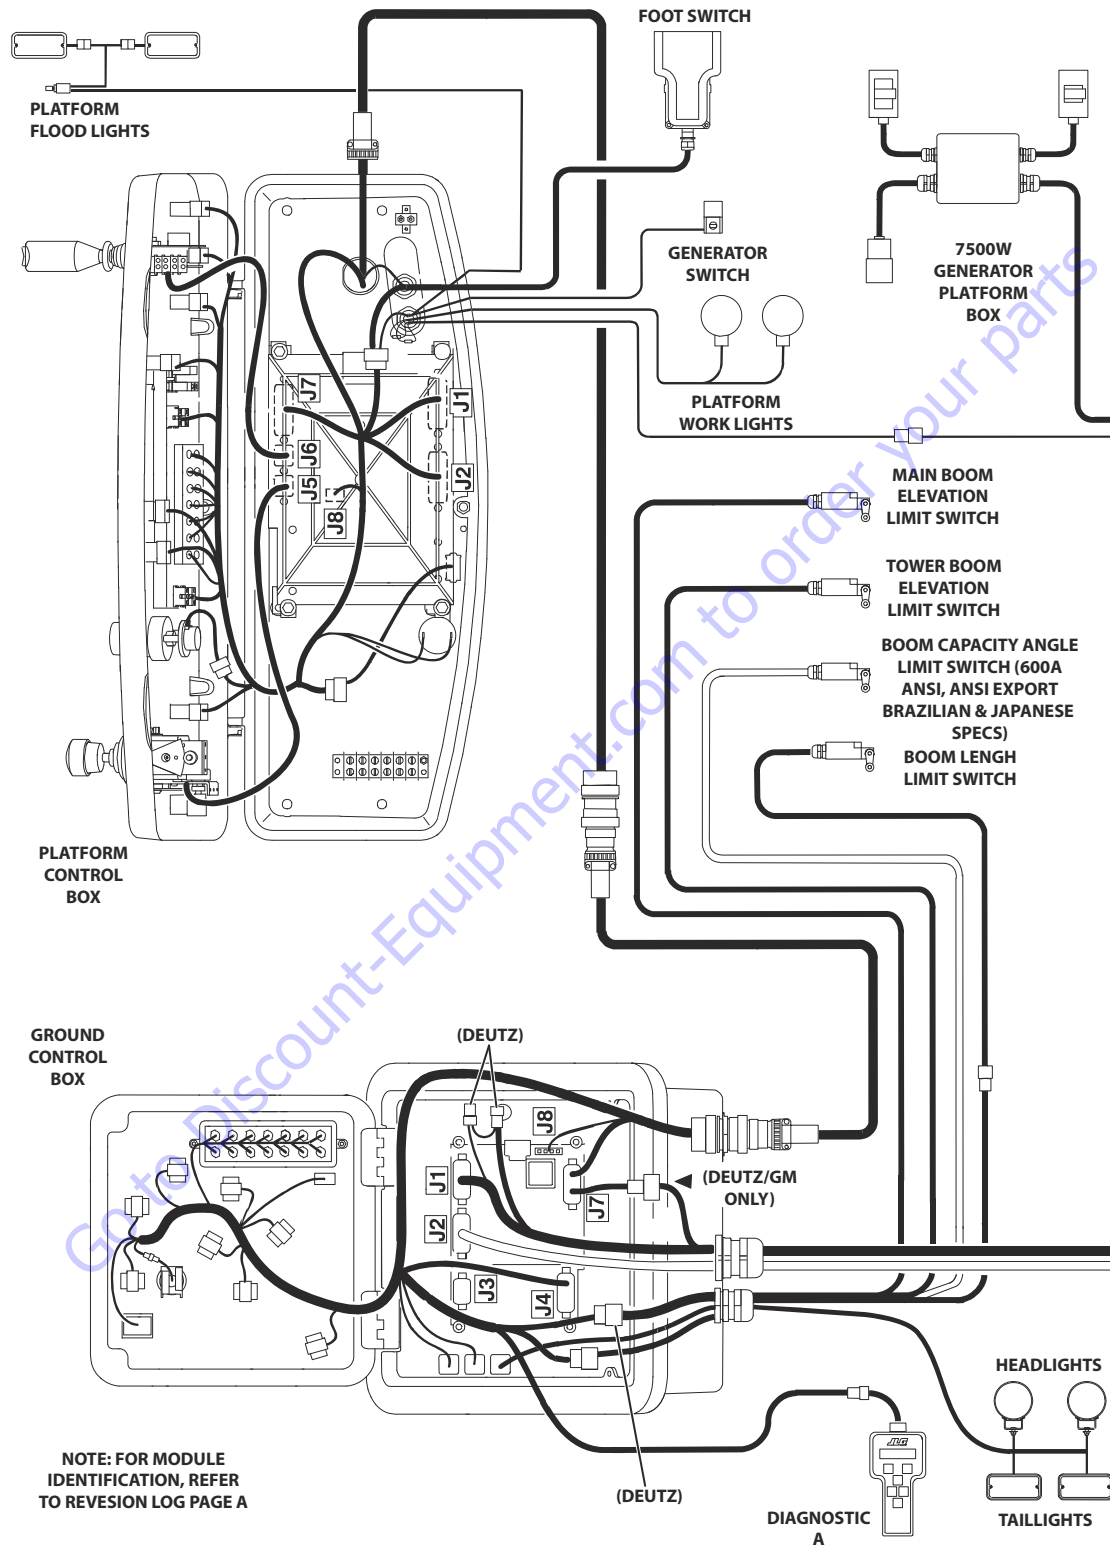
Electrical Components Installation without UGM - Sheet 1 of 2
